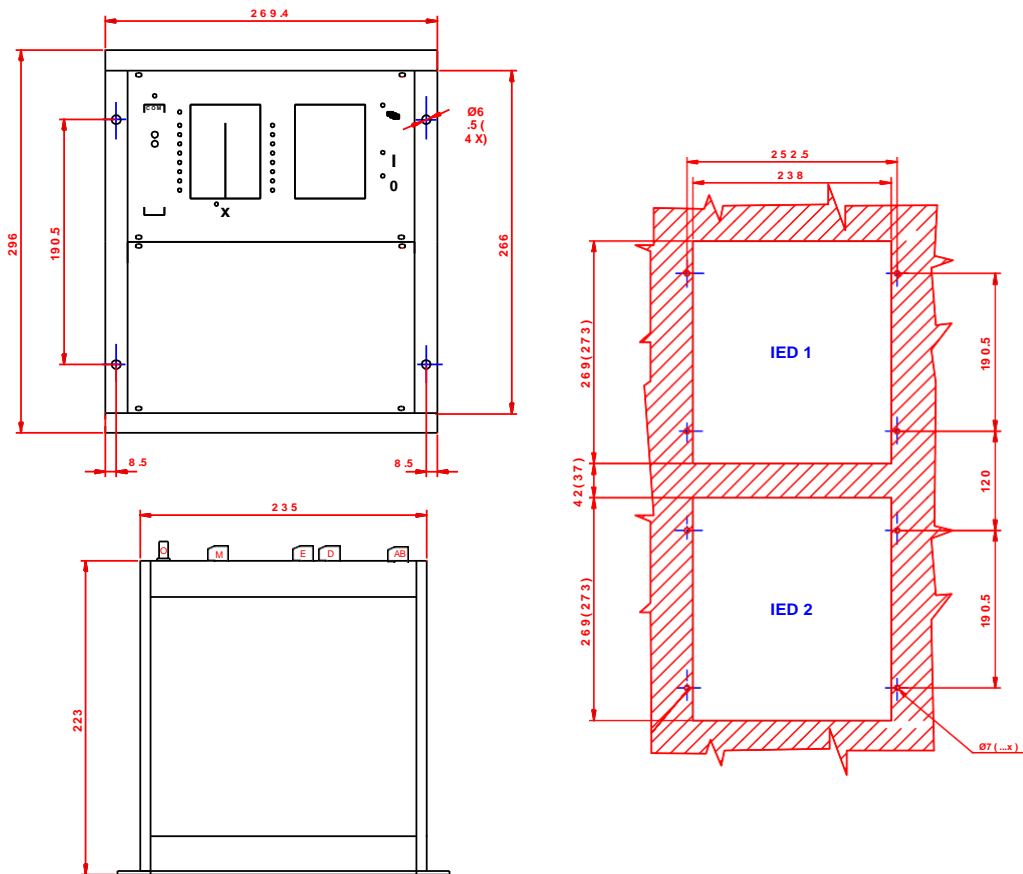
Dimensions for flush mounting of 42 HP double rack
